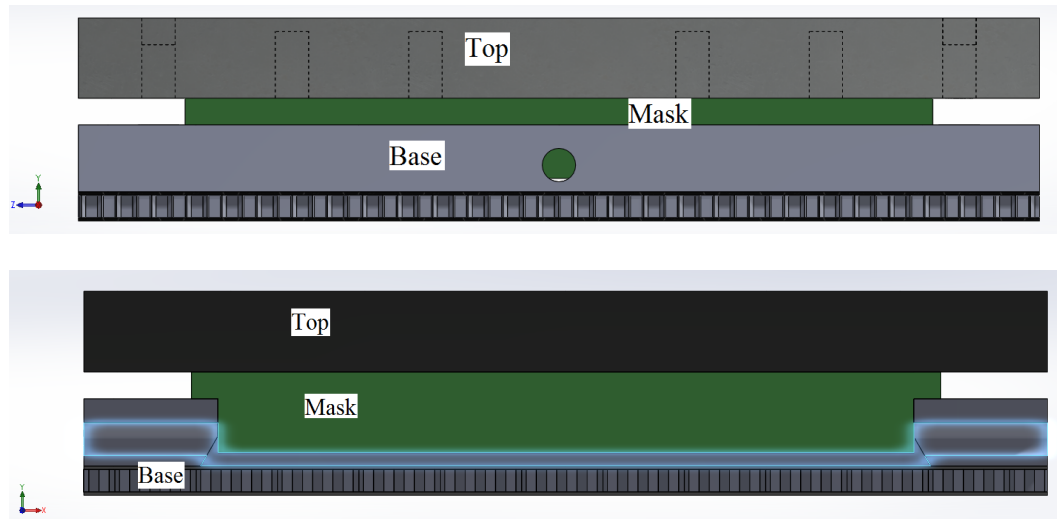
, Top: Front view. Bottom: Cross section of mold. In the top and bottom images the top and base sections of the mold are shown in grey. The mask is shown in green. The mold cavity is outlined in blue in the bottom image.
